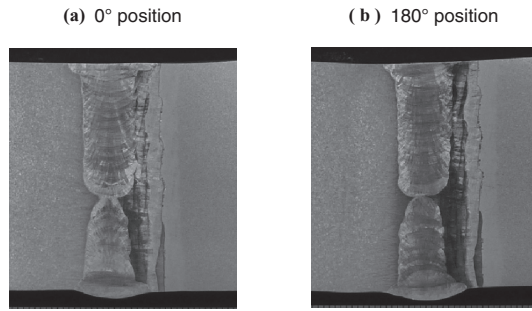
Macrostructures of cross section for dissimilar metal pipe joint welding
